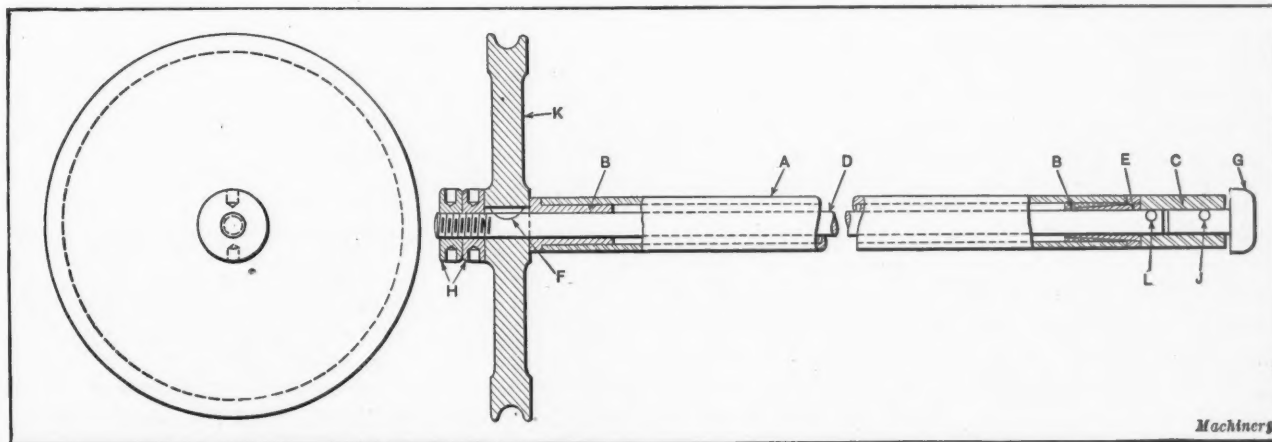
Improved Tool-carrying Spindle used in finishing Interior of an Aluminum Pattern
